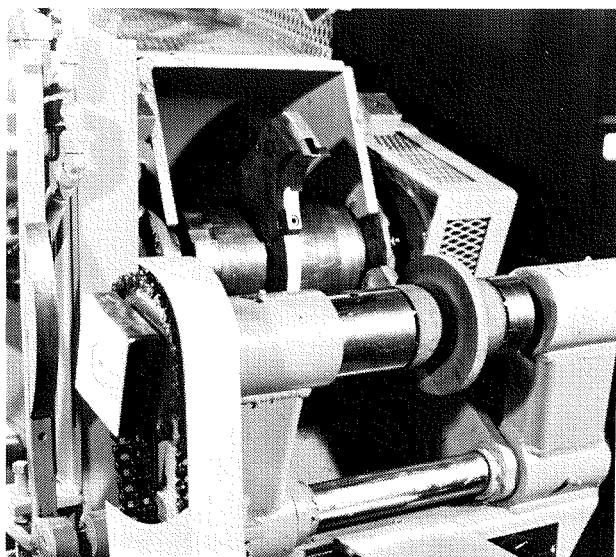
One-knife head for making pulp chips 5/8-inch long.
